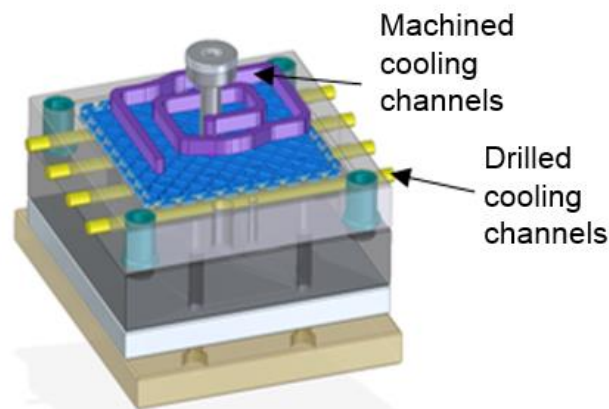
Cooling channel layout of the conventionally manufactured insert.
